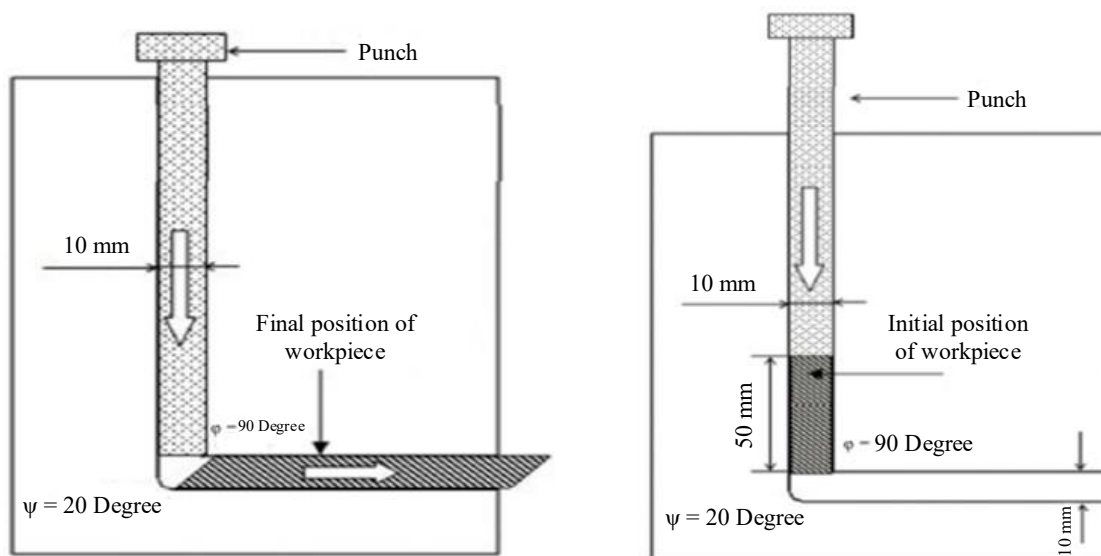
The final arrangement of the ECAP setup and initial configuration of the billet after processing with the die [9].
